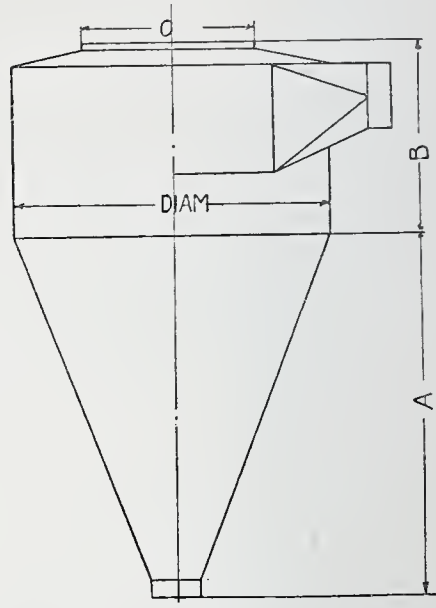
Quigley Pulverised Fuel Cyclone Separator for Coal Dryers.
